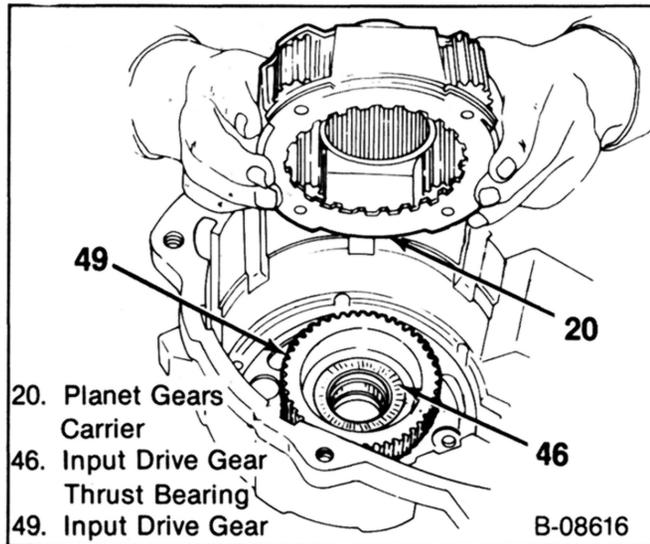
Input Gear, Mainshaft Thrust Bearing, and Planetary Gear Installation
